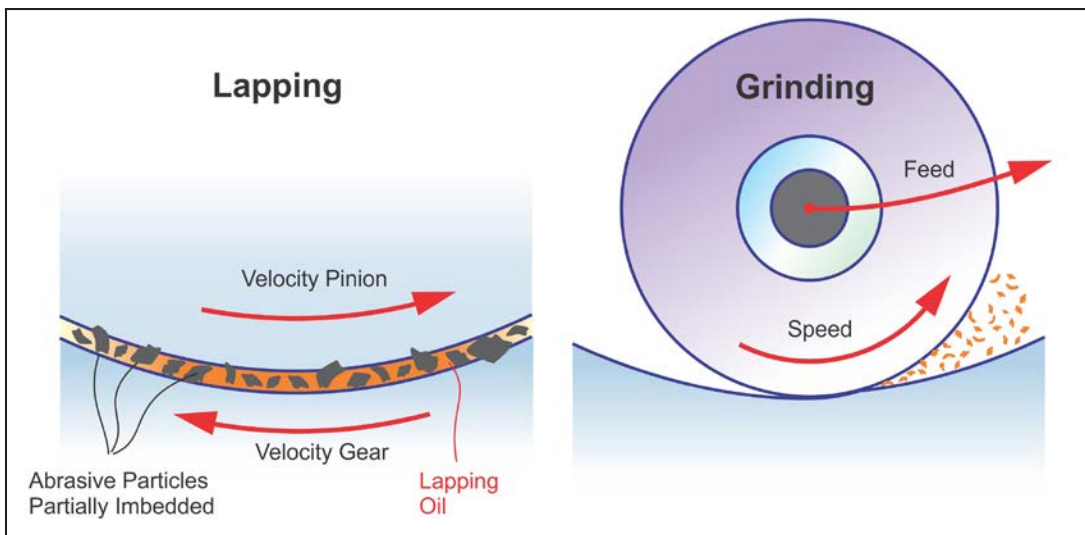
Material removal mechanism: (left) lapping; (right) grinding.
